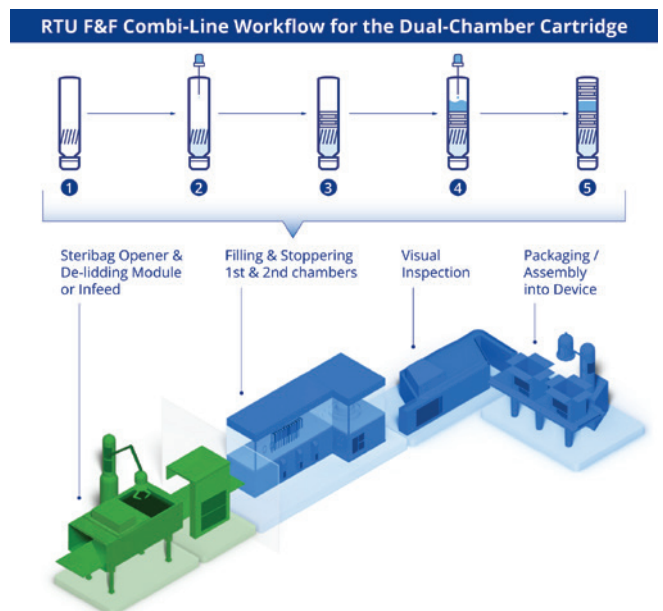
RTU fill-finish combi-line workflow for the dual-chamber cartridge. This shows the five filling stages followed by visual inspection and device assembly. (Implementation will still depend on the selected machine model. Some lines may require engineering adaptations for the second filling and plunger-insertion steps.)
